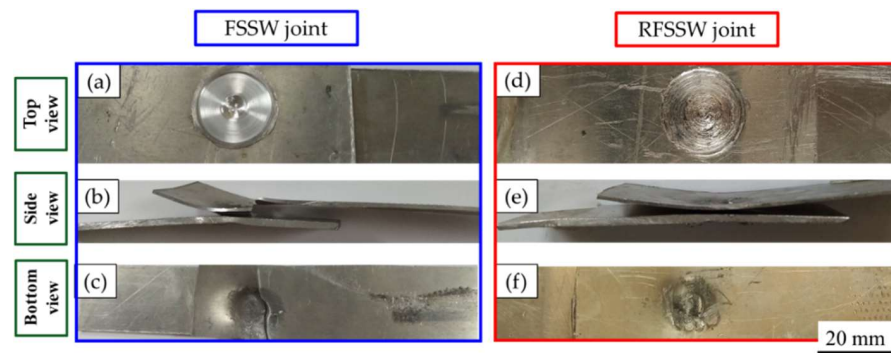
Top, side, and bottom photographs show the joint appearance of the AA6082-T6 dissimilar sheet thickness welded at 600 rpm and 3 s after tensile testing, where (a–c) the FSSW joint [36] and (d–f) the RFSSW joint are refilled with AA2011-T6 at 400 rpm and 1 mm/min.
